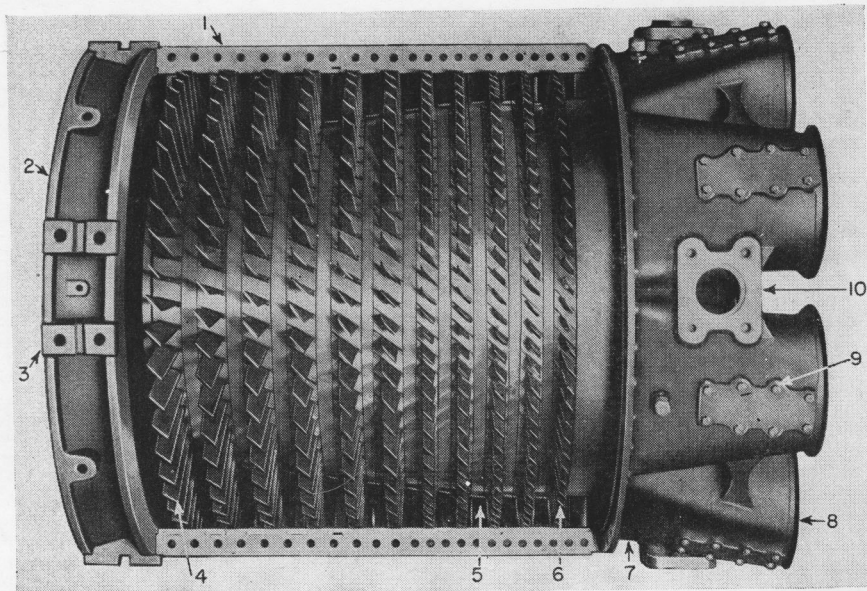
TG-180 compressor assembly with half of the casing removed showing details as follow: (1) compressor casing, lower half; (2) forward frame; (3) mounting trunnion; (4) first-stage rotor disk; (5) stator blade; (6) eleventh-stage rotor disk; (7) mid-frame; (8) combustion chamber opening; (9) for fuel nozzle opening; (10) main mounting trunnion.
